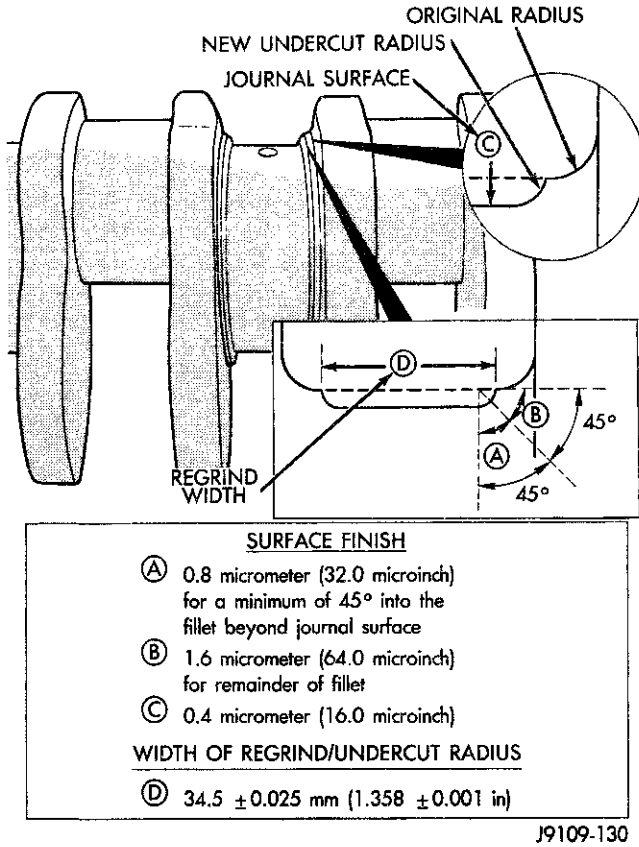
Grind Crankshaft Main Journal—Alternative Method
